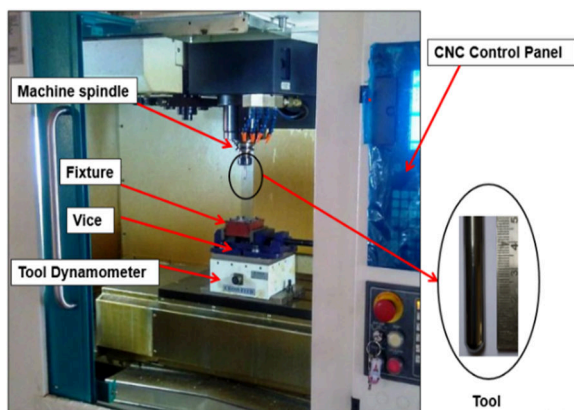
Experimental set for SPIF process with Jyoti PX20 CNC milling machine
